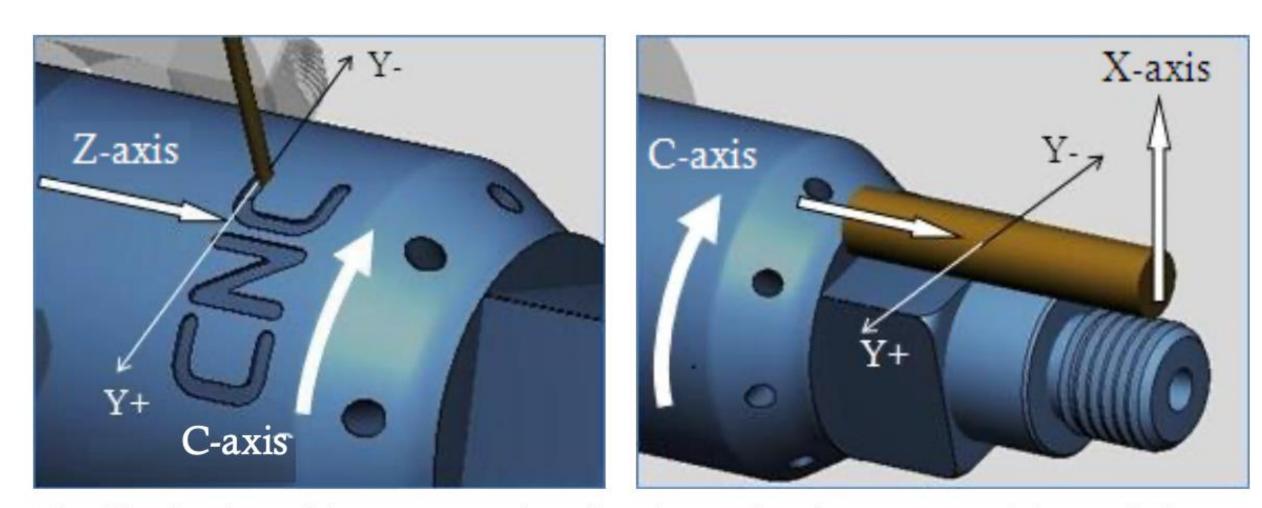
C-axis positive programming direction and real movement of the workpiece
